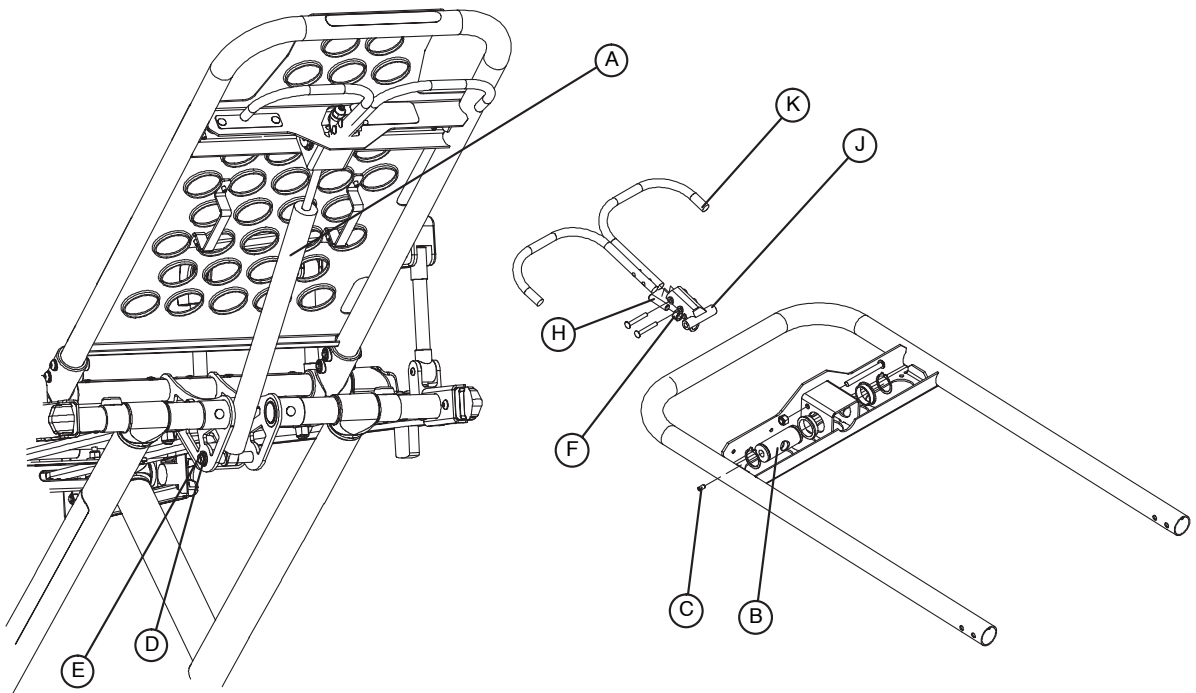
Pneumatic Cylinder and Fowler Crossbrace
